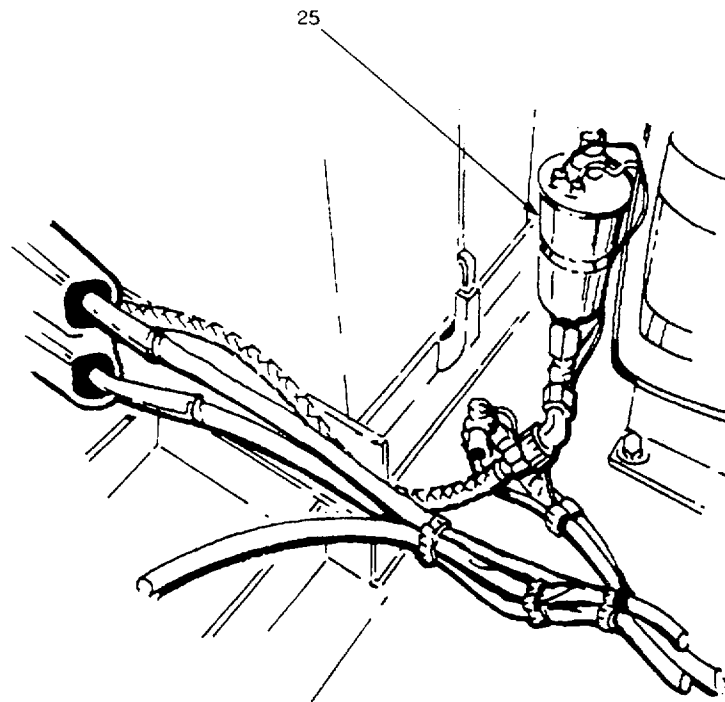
Mobile Check and Adjustment Stand (Sheet 1 of 3).
